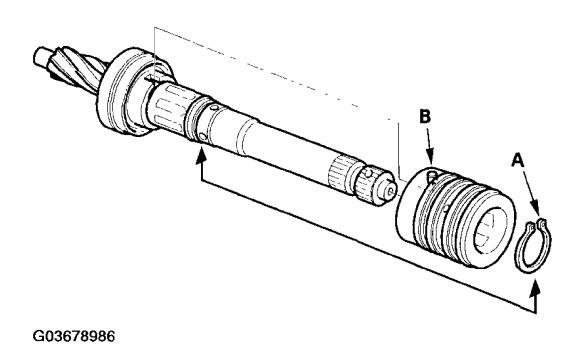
Removing External Snap Ring And Sleeve From Pinion Shaft Courtesy of AMERICAN HONDA MOTOR CO., INC.
